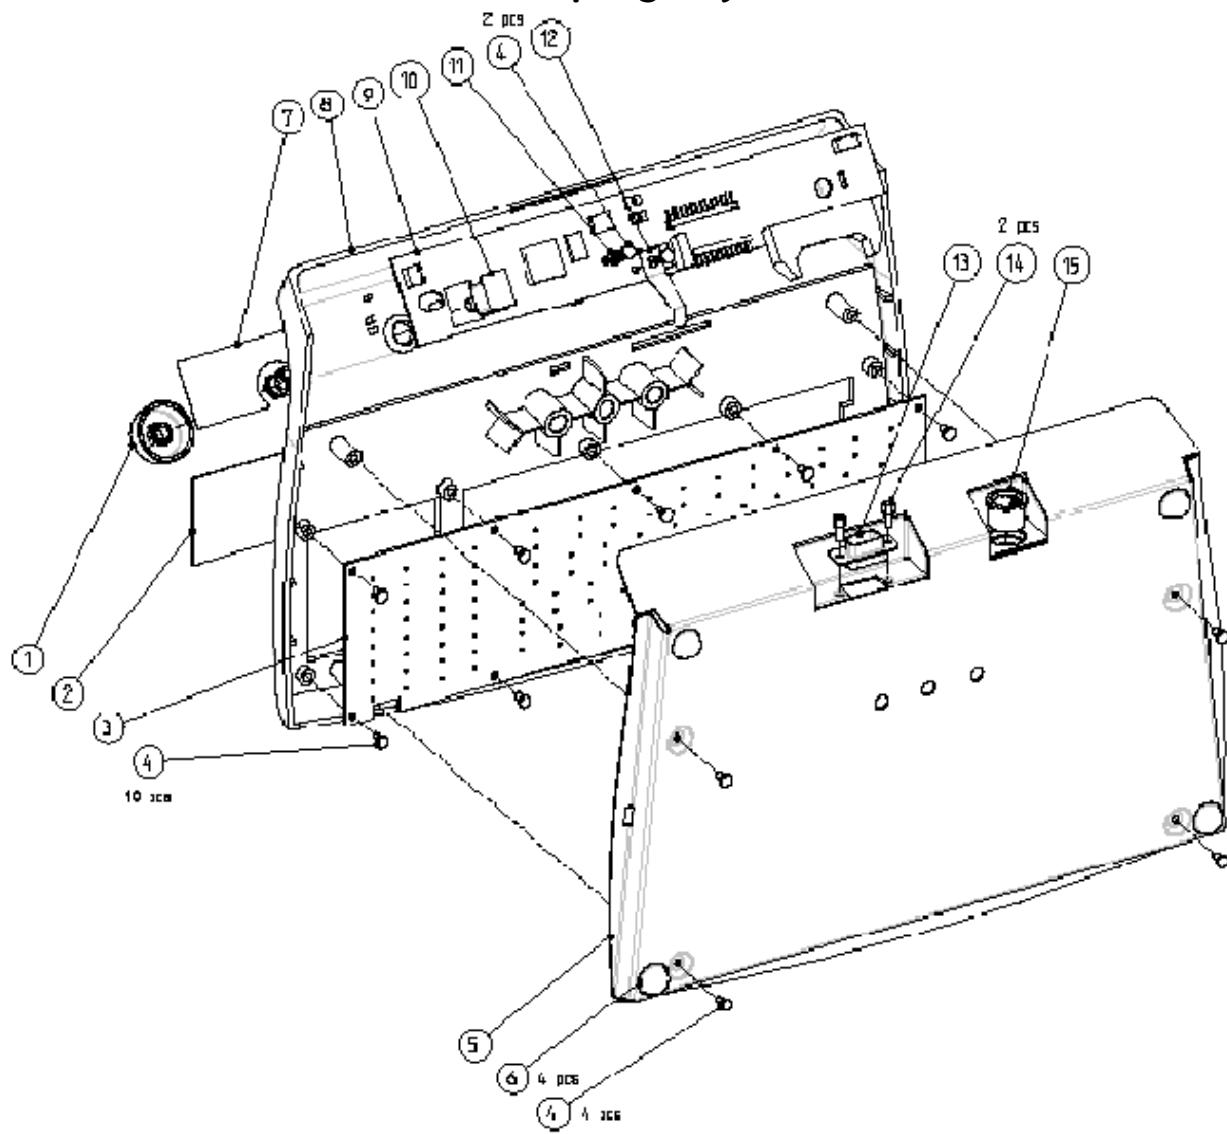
Exploded view of the Anesthesia Record Keeping Keyboard
